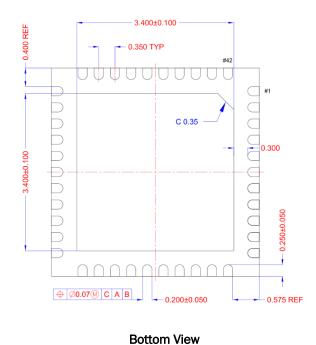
Timp QFN42 Bottom View Mechanical Drawing
